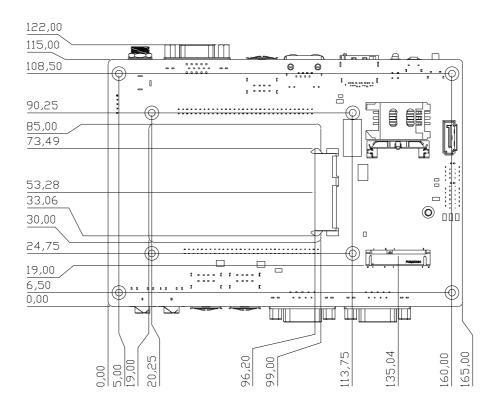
MIOe-DB2000 Mechanical Drawing (Bottom Side, with optional DC Jack)
